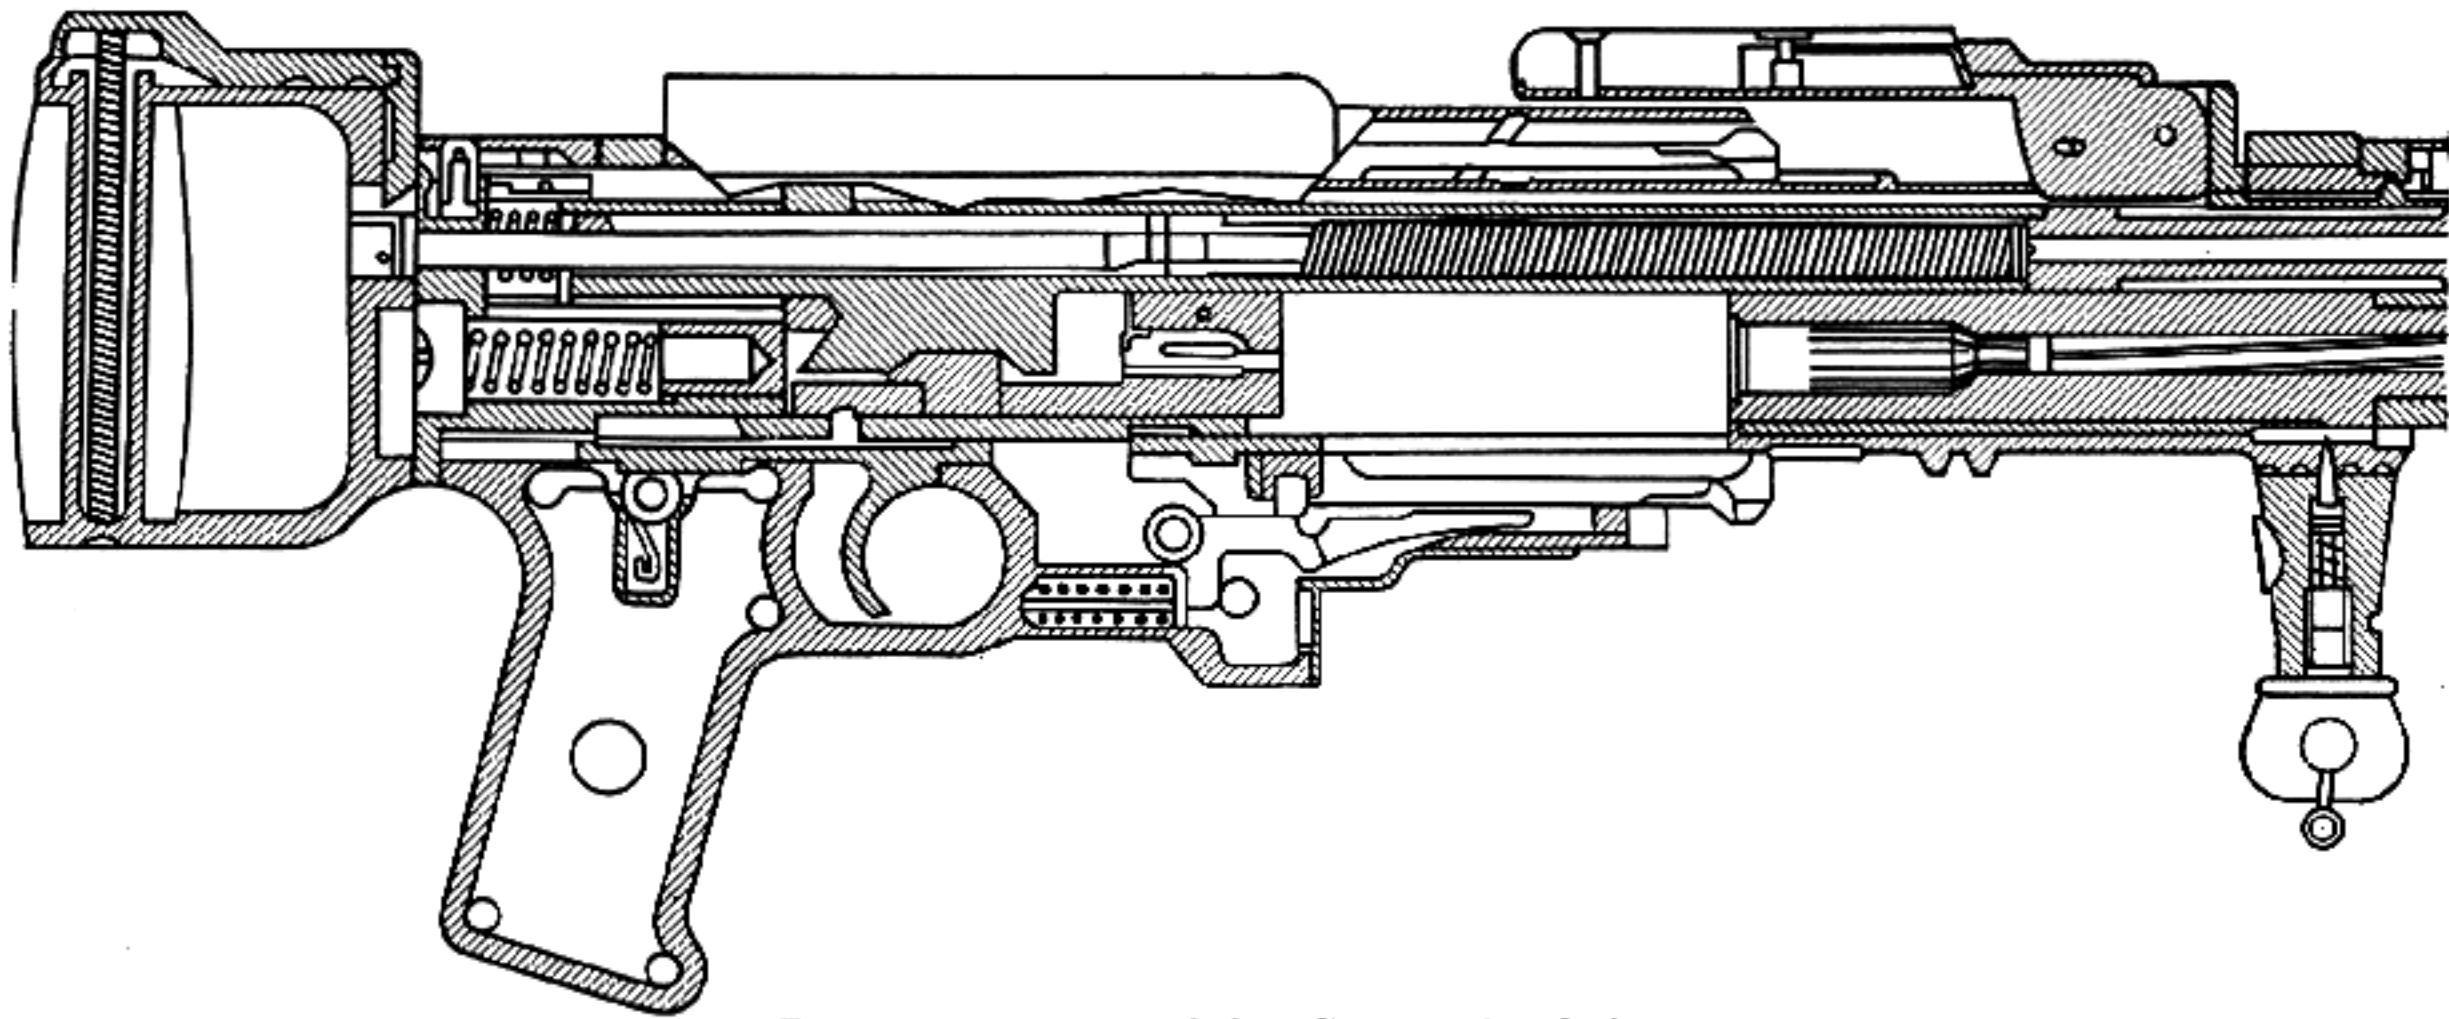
7.62-mm Shkas Gun, sectional view.
